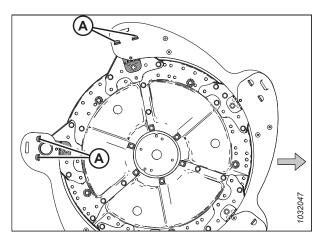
Reel Endshield Removed – Inboard Cam End
